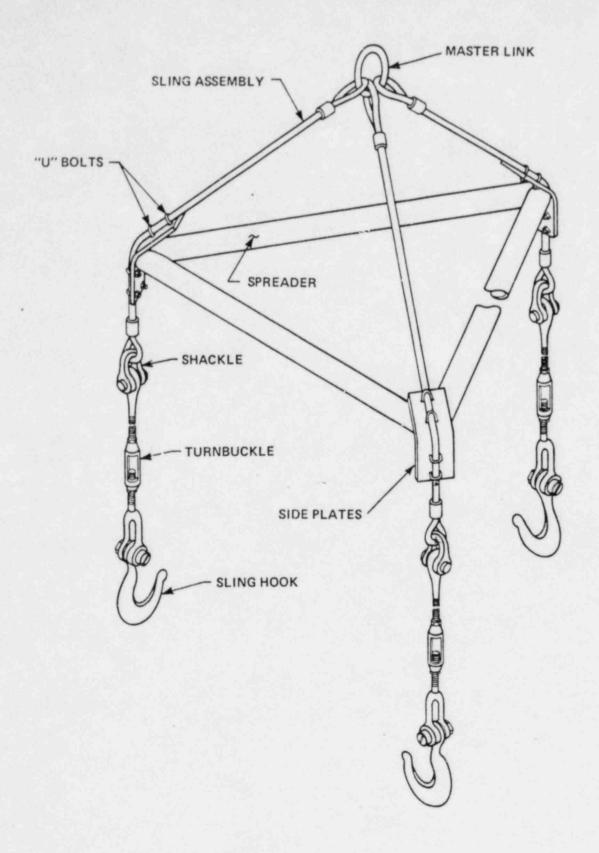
Reactor Coolant Pump Motor Lift Sling
